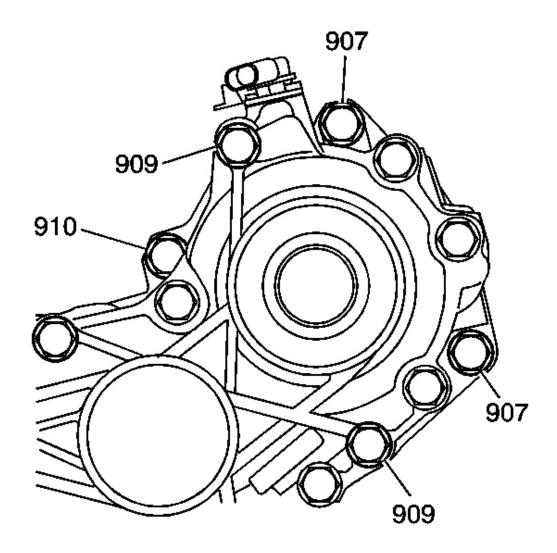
View Of Transfer Case To Case Bolts Courtesy of GENERAL MOTORS CORP.
